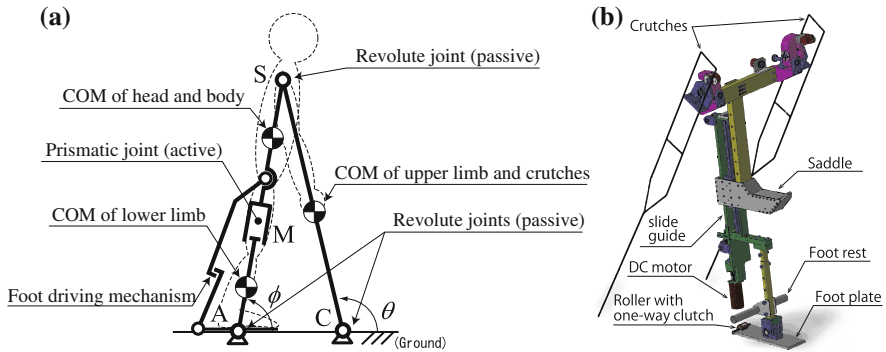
Composition of WAMC. a Schematic drawing. b 3D-CAD drawing
